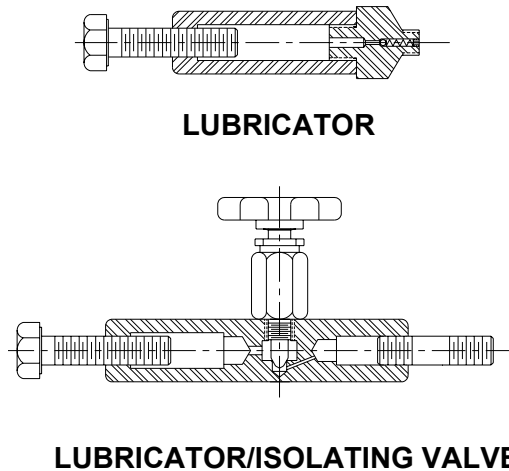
LUBRICATOR AND LUBRICATOR/ISOLATING VALVE
